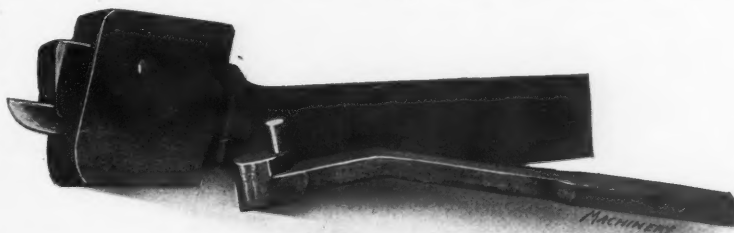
Fuller Tool-holder with Cutter in Place ready for Use
